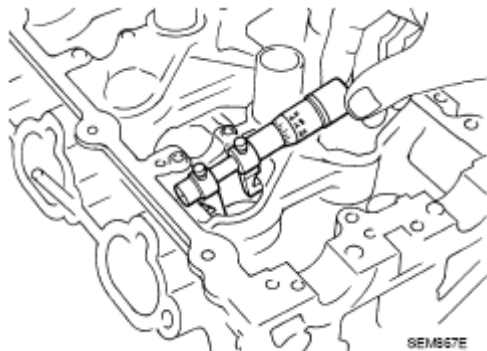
Measuring Diameter Of Valve Lifter Bore Of Cylinder Head
